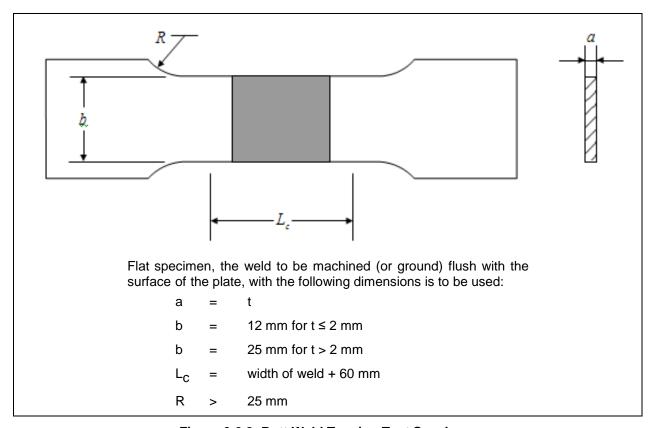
Butt Weld Tension Test Specimen
